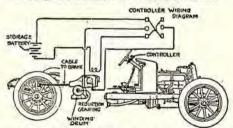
The Hartford electric brake, consisting of a braking motor operated from a storage battery and controlled by a lever controller on the steering column.
